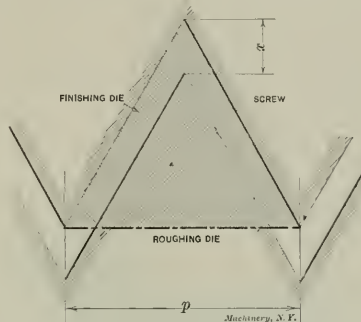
Diagram of Metal Removed, Standard Sharp V Thread.
